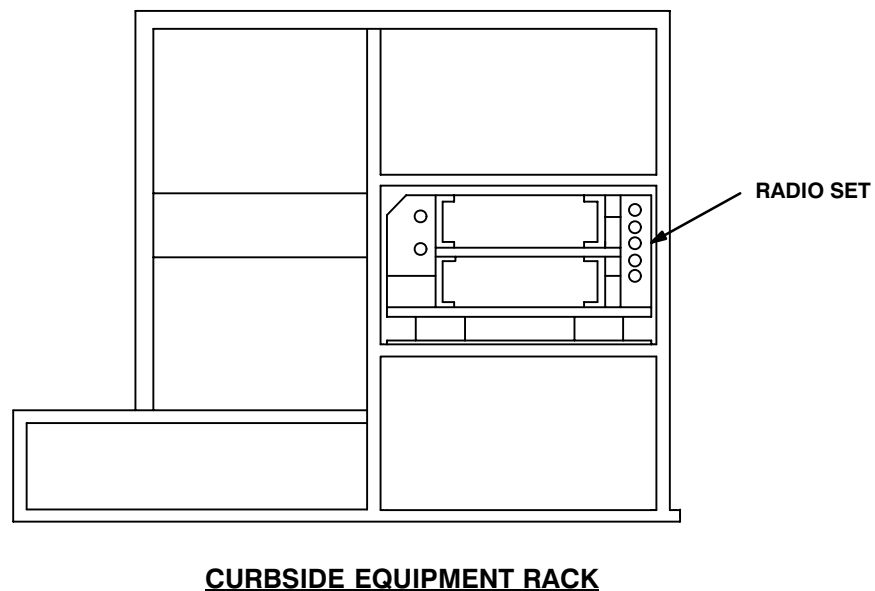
(2). MK and Radio Installation: Radio Equipment Locations
